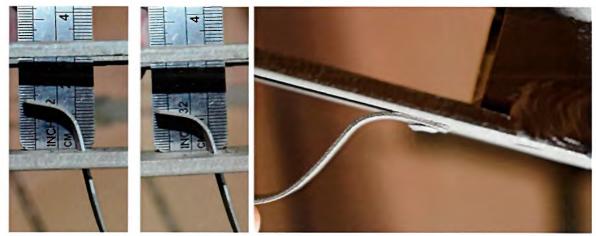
Exemplar 2010 Summit Viper QuickDraw free play measurement and rivet
